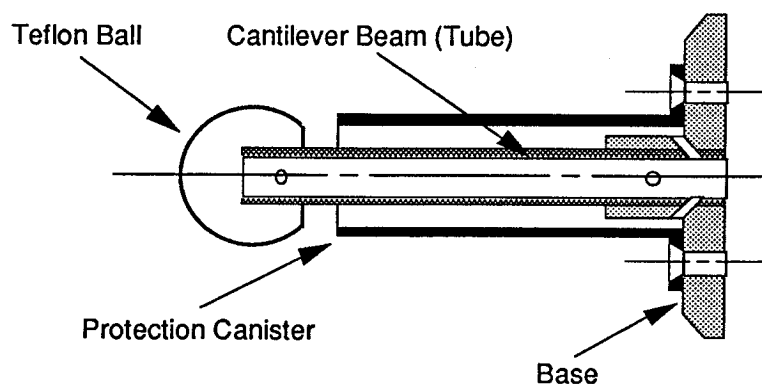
Instrument Task Board Joystick Mechanical Assembly
